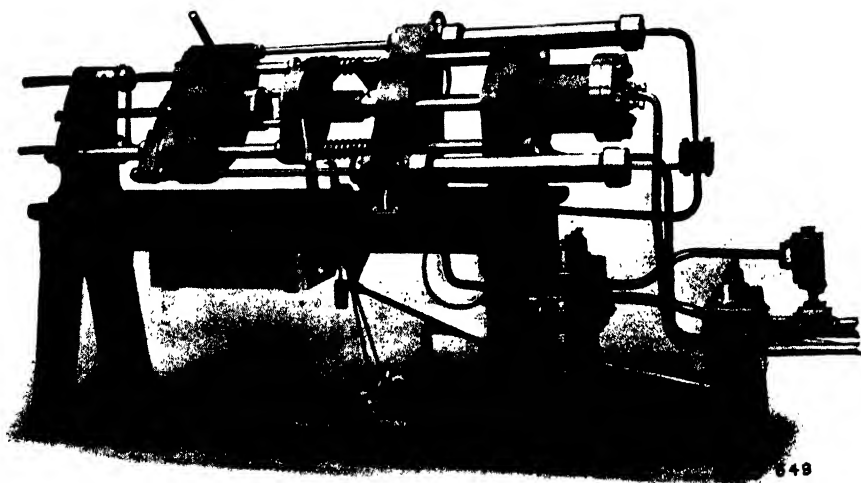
Hydraulic Injection Machine. (Francis Shaw & Co., Ltd.)
